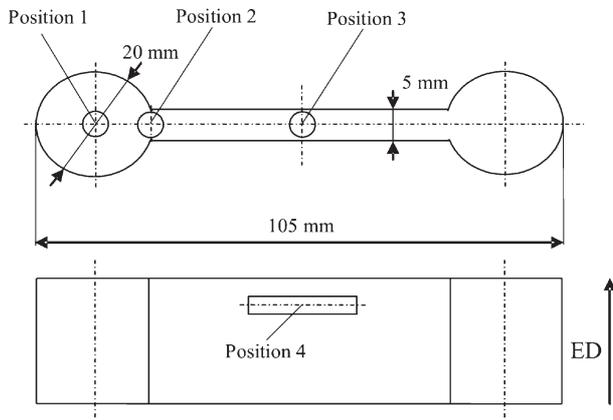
Schematical drawing of extruded profile with setting out of sample positions.
